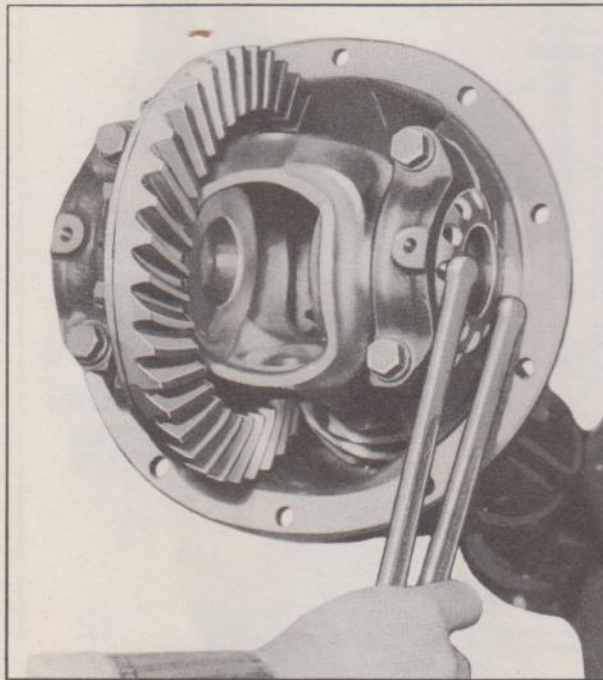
Adjusting Ring Gear and Pinion Back Lash
